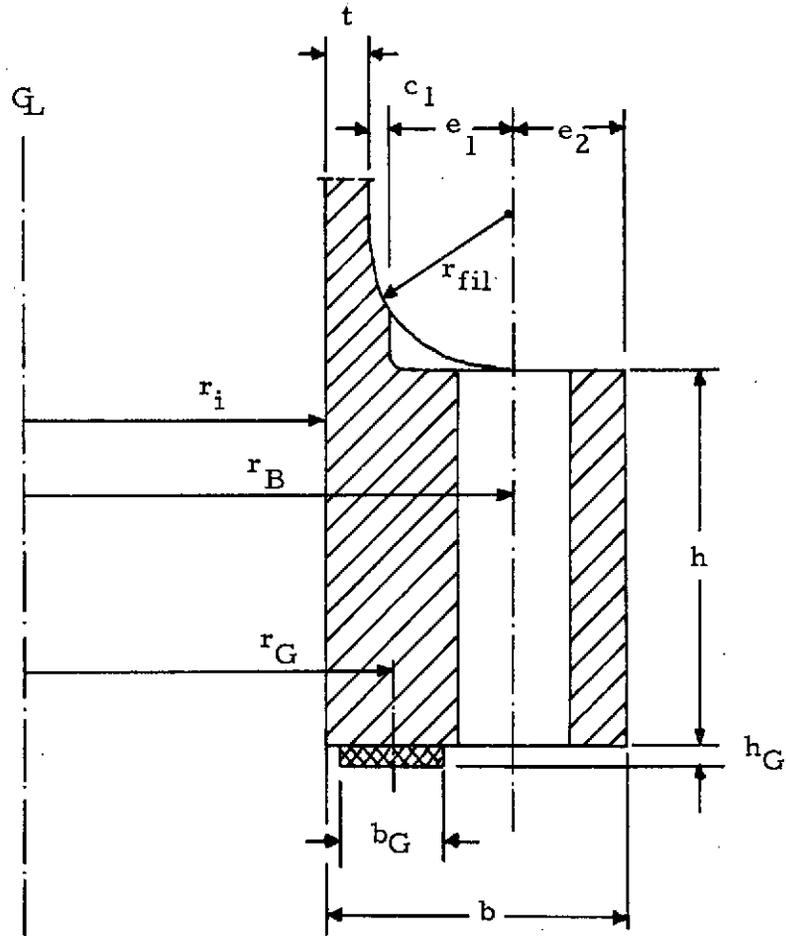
Low Profile Flange with Machined Spot Faces
